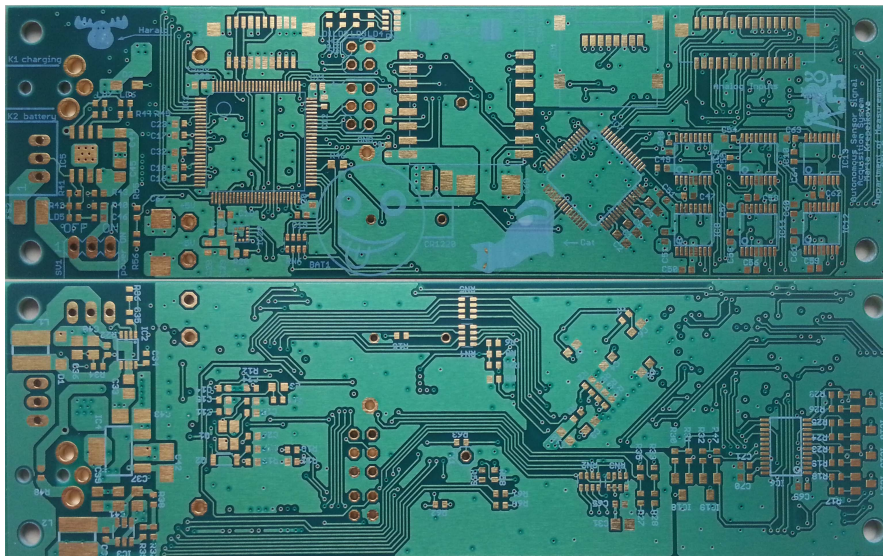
The TOP and the BOTTOM side of the final device's PCB.
